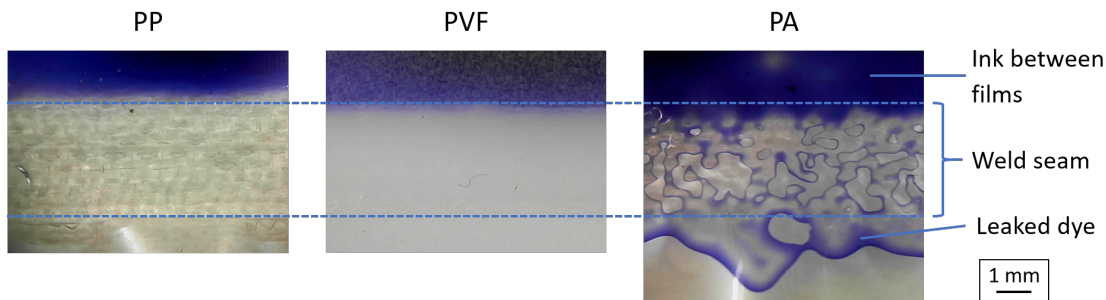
Weld seam investigations of PP, PVF and PA films via the dye-test adhered to the standard ASTM F1929 [166]. [154]
